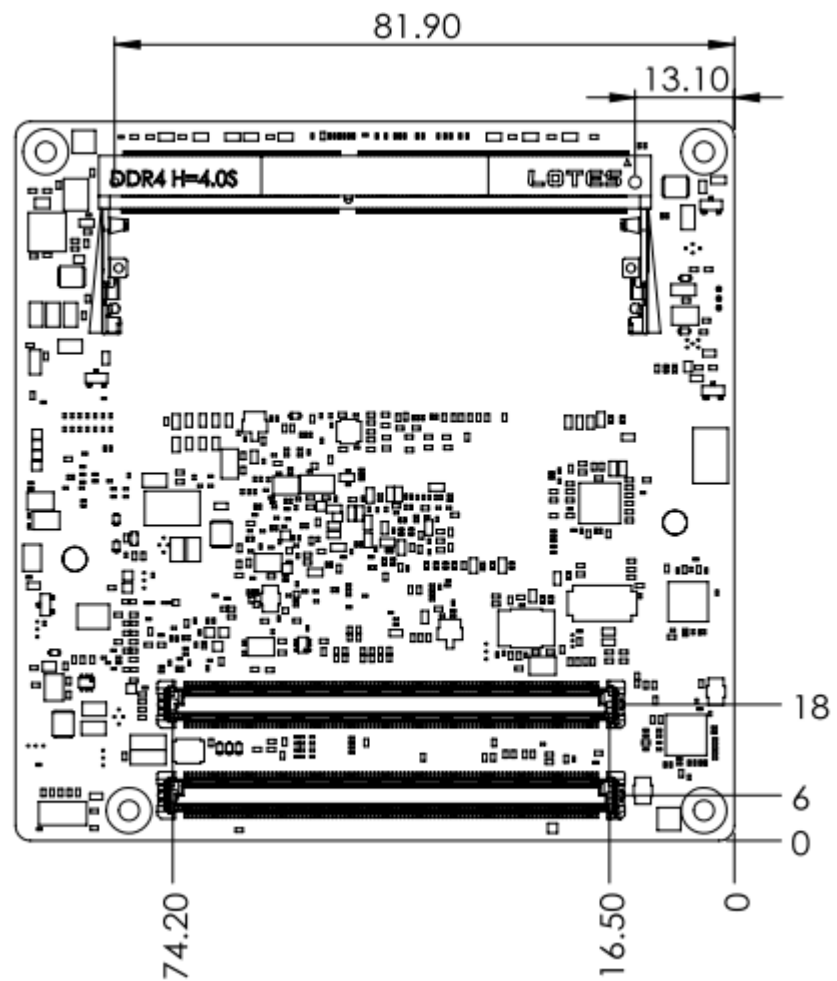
Pentium Series Board Mechanical Diagram – Rear
